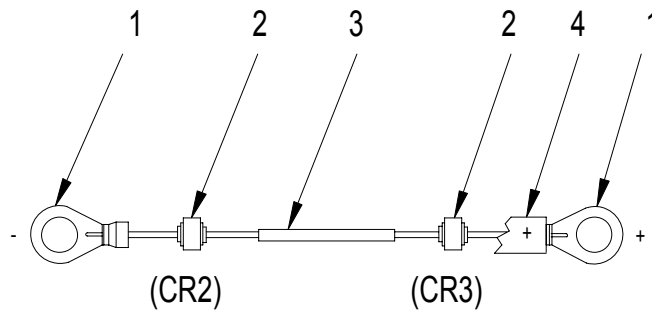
Transient Suppressor Assembly (MEP-501A)
